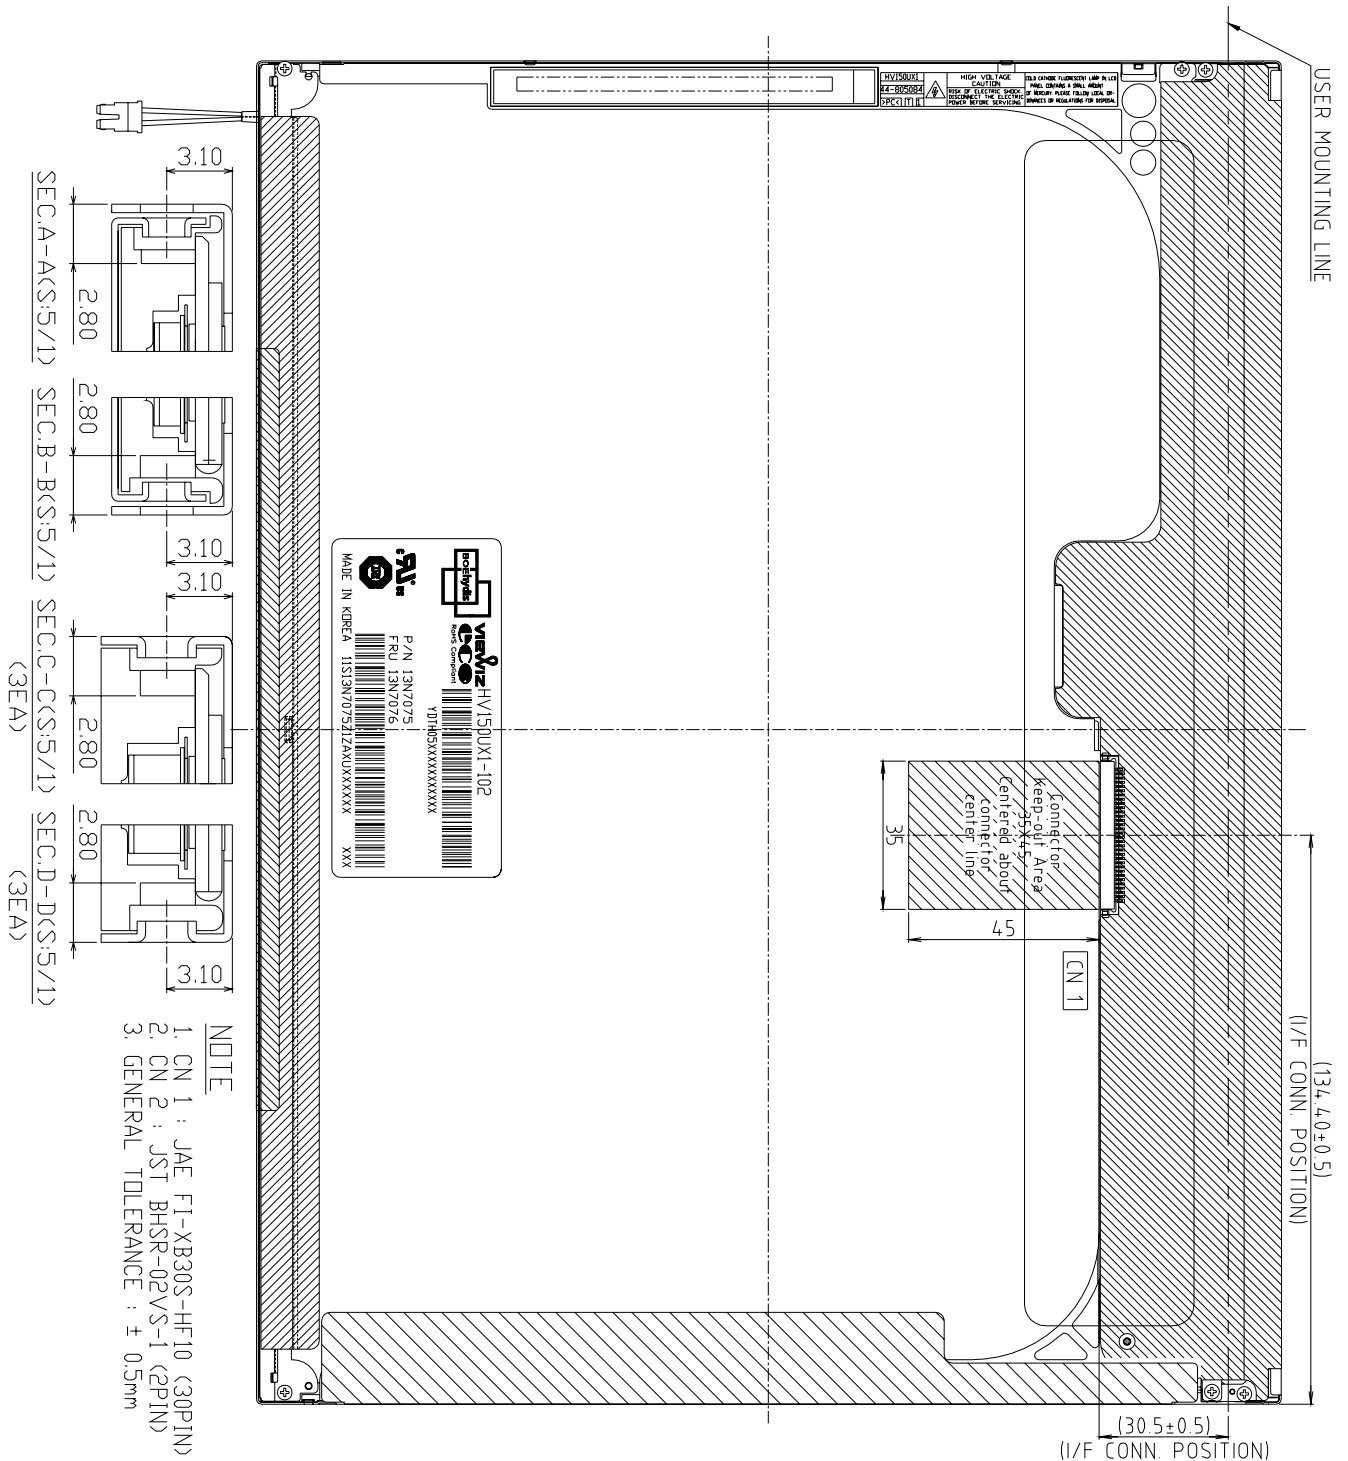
TFT-LCD Module Outline Dimension (Front View)
